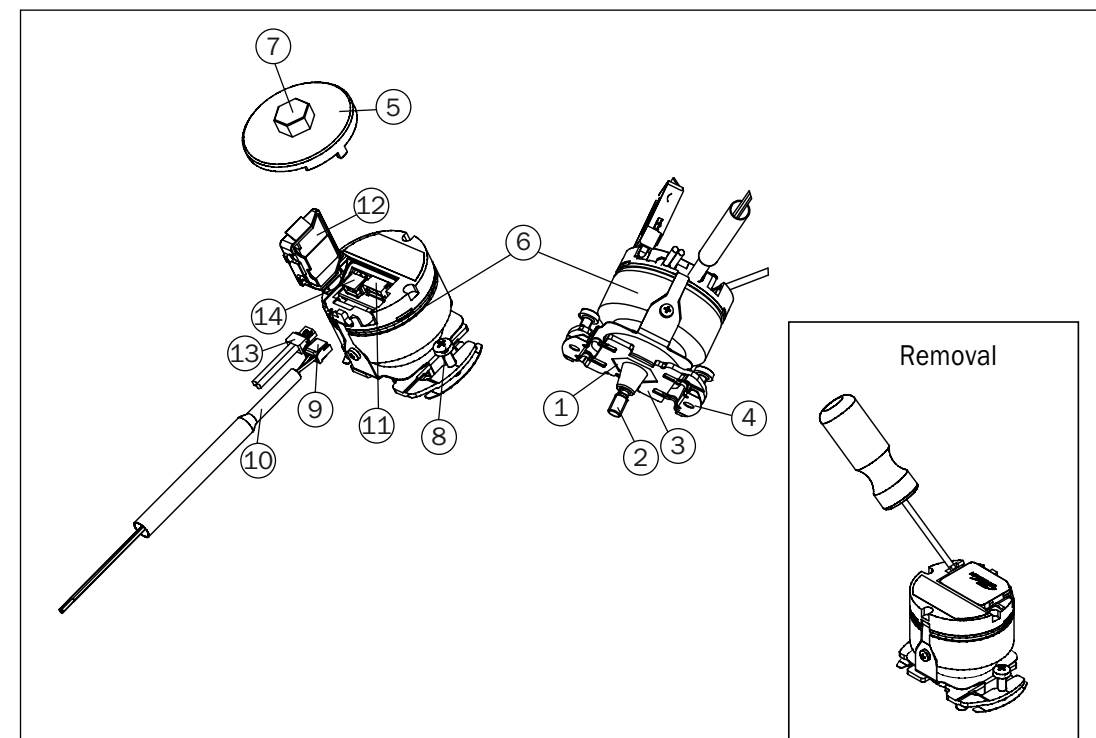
Assembly drawing EKS36-0J/ EKM36-0J/ EKS36-0K/ EKM36-0K tapered shaft
